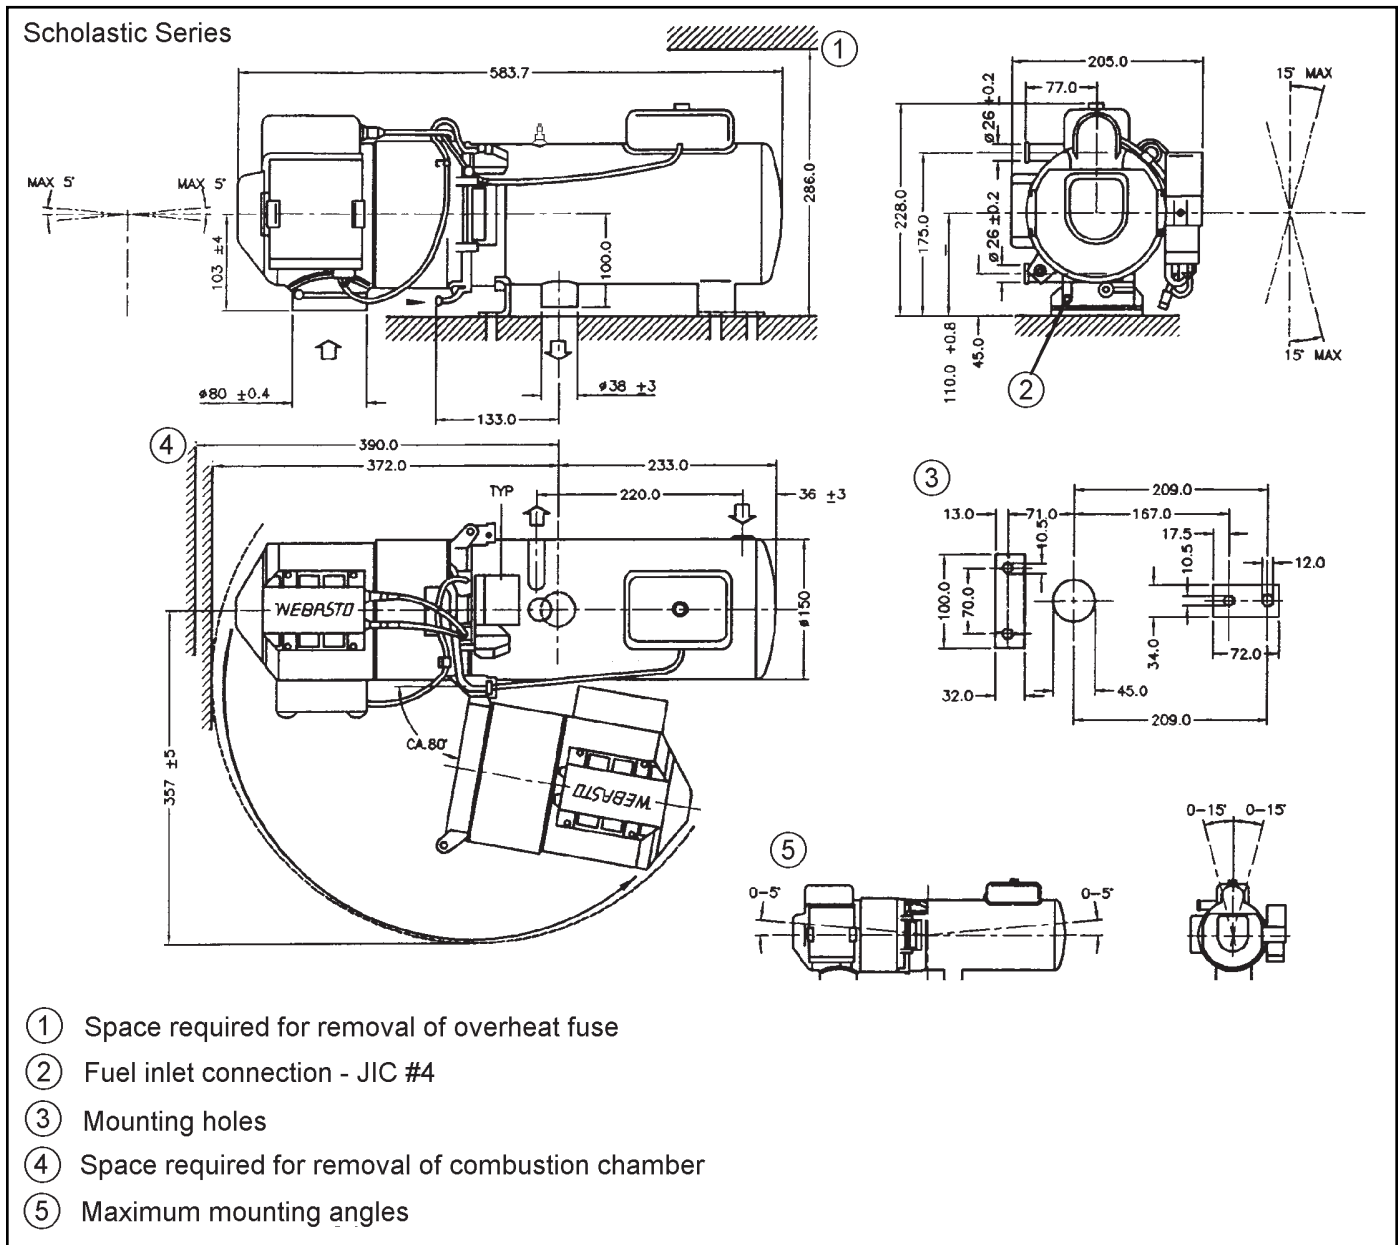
Scholastic Series Heater Dimensions (Millimeters)
